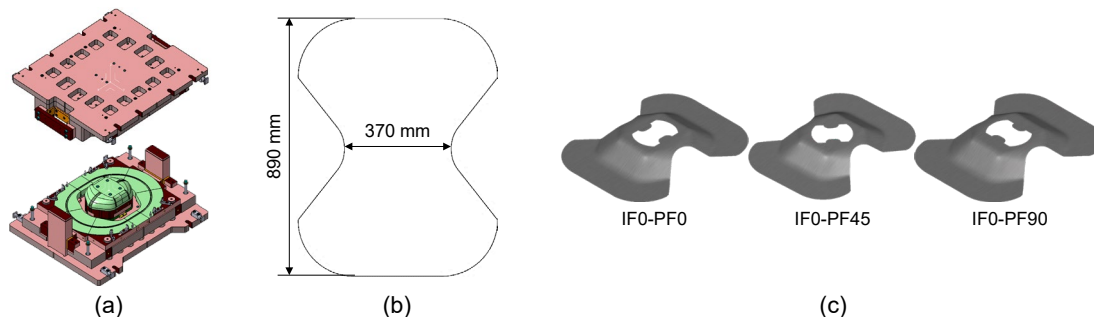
(a) The used modified Marciniak tool, (b) Specimen geometry used for the plane-strain pre-forming. (s) Specimen extraction and nomenclature of the cut-out specimens.
